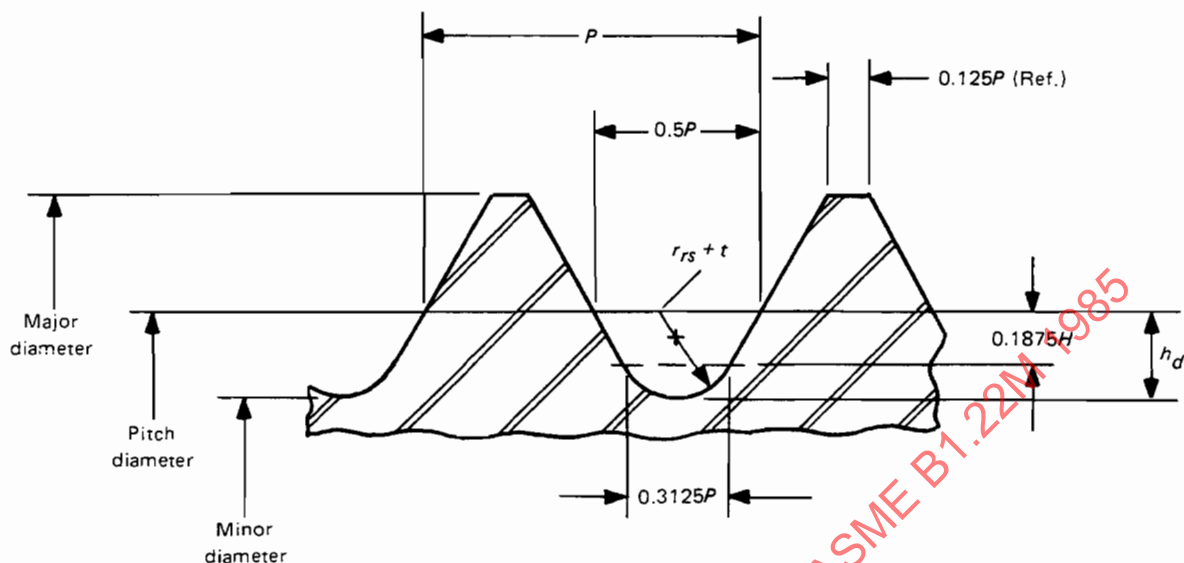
MJ FULL-FORM THREAD PLUG GAGE
